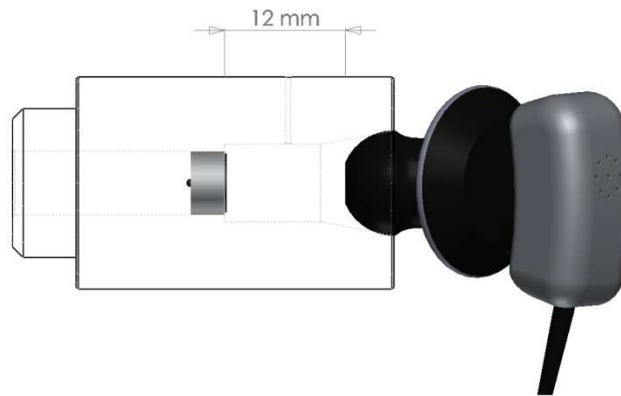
Design drawing, acoustic coupler prototype 2
